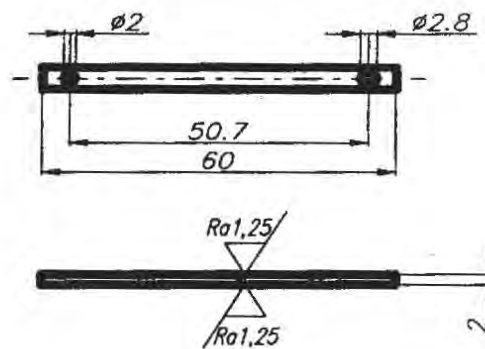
Shape and dimensions of the aluminium alloy and composite material specimens
